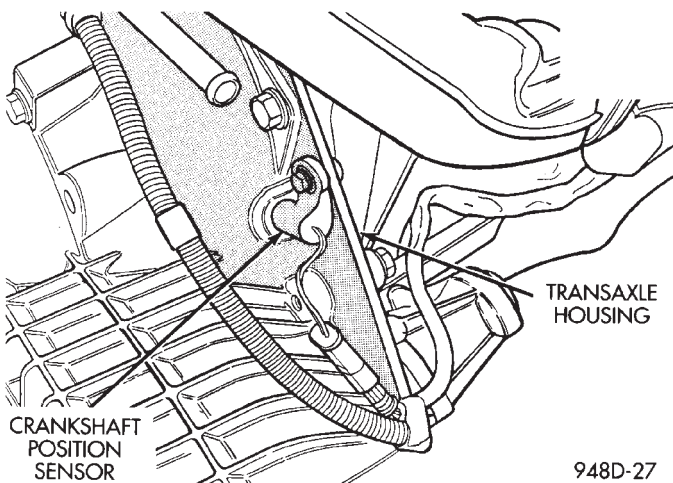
Crankshaft Position Sensor Location—3.0/3.3/3.8L
